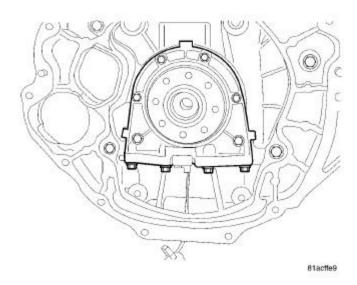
REAM MAIN SEAL AND OIL PAN BOLTS Courtesy of CHRYSLER LLC
